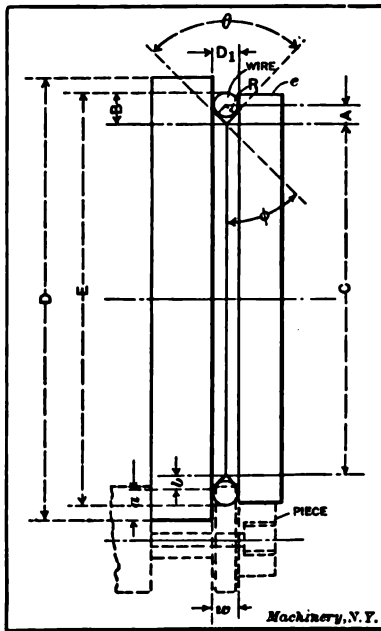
Wire Method employed for Measuring Circular Form Tools
